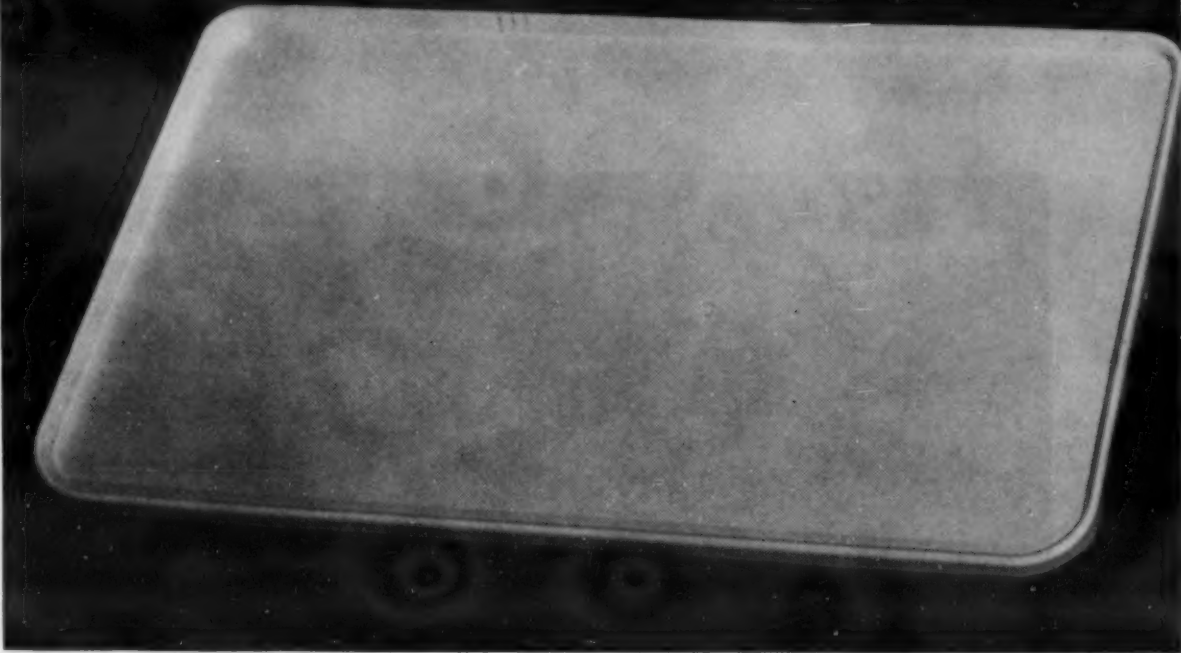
Table top produced by Trimble, Inc., with one-stroke draw from 0.030 K-150. No trimming is required after the draw.
